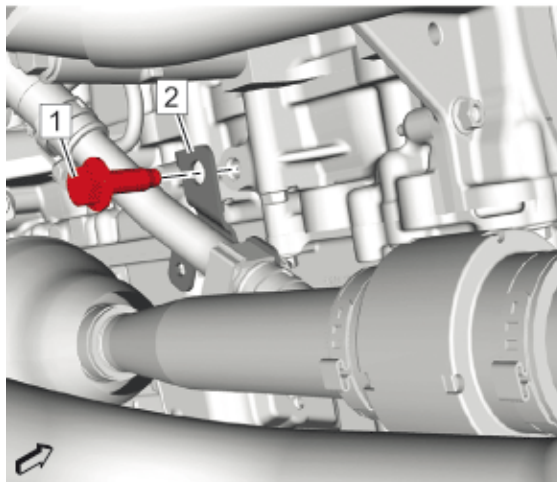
Heater Inlet And Outlet Hose Bracket And Bolt
